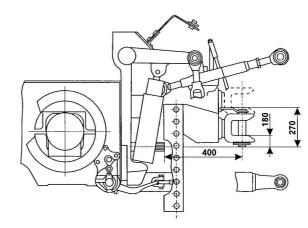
Upper transport bracket of tractors PRONAR-82SA II – structure and basic dimensions. 1 – cotter pin; 2 – bracket console bolt; 3 – connection bolt nut; 4 – connection bolt counter-nut; 5 – transport bracket console; 6 – transport bracket fork; 7 – transport bracket bolt; 8 – height adjustment guides for transport bracket; 9 – agricultural bracket; 10 – agricultural bracket bolt.
